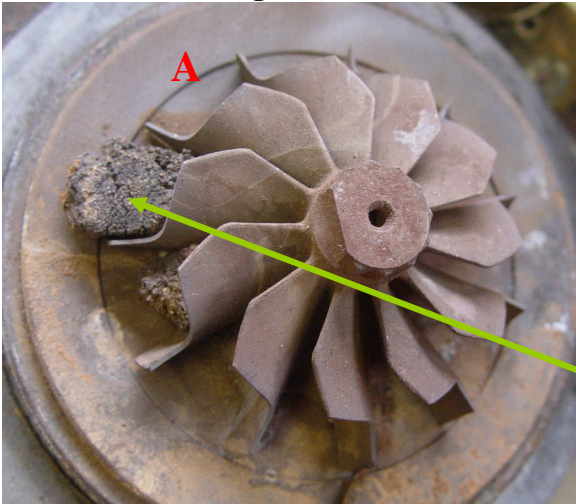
Turbocharger A, exhaust turbine showing ingested foreign matter (digital)
